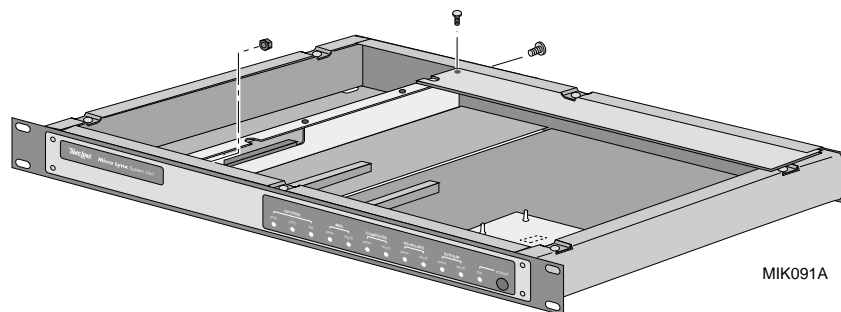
13. Install the ACG Option Card Bracket
